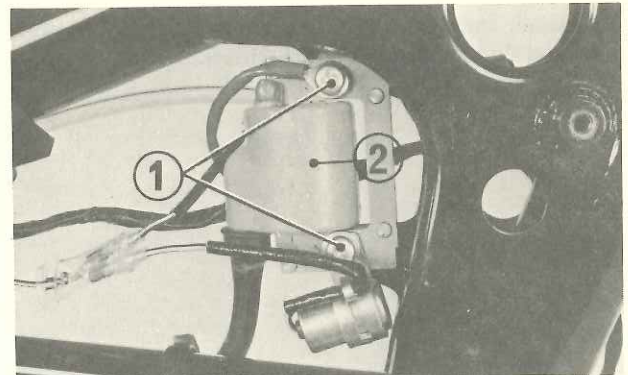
(1) 6 mm bolts (2) Ignition coil
